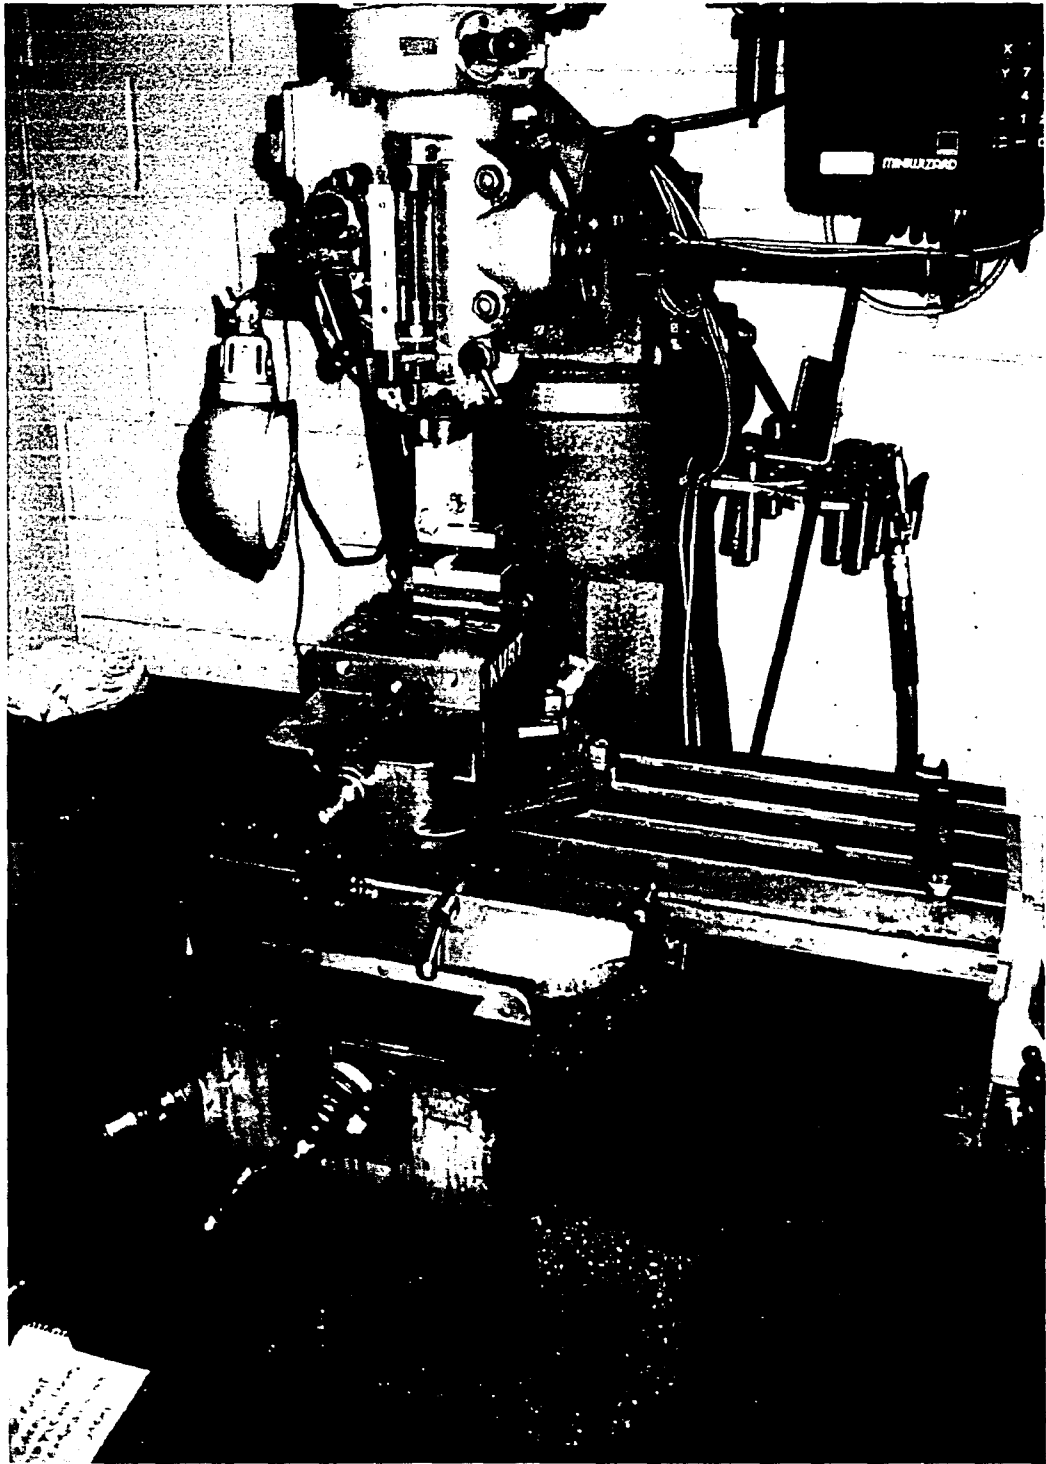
Photo of Bridgeport milling machine used for mechanical embossing
